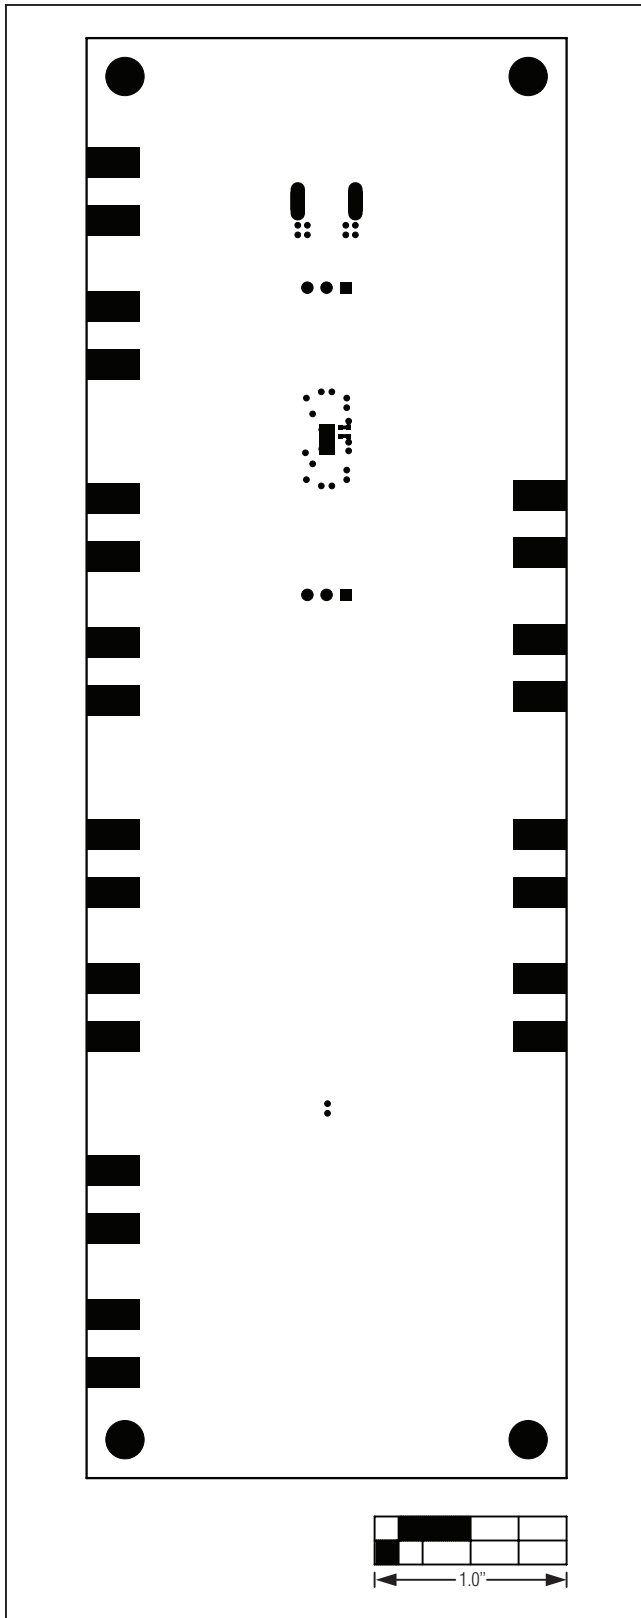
MAX4888B EV Kit PCB Layout—Solder Side
